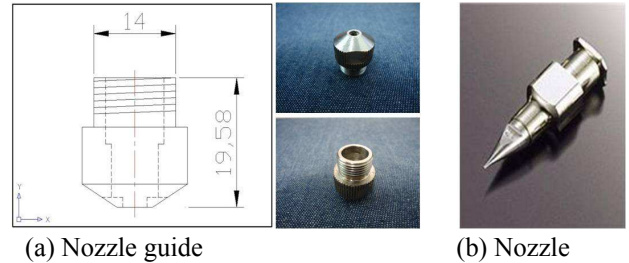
Images of (a) structural drawings of a nozzle guide and (b) used a nozzle
